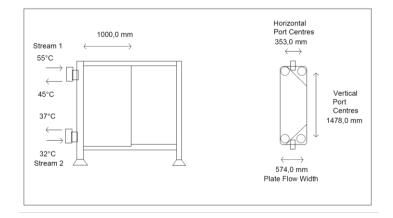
Dimensions of the plate heat exchanger used for the Intercooler and the Heater
